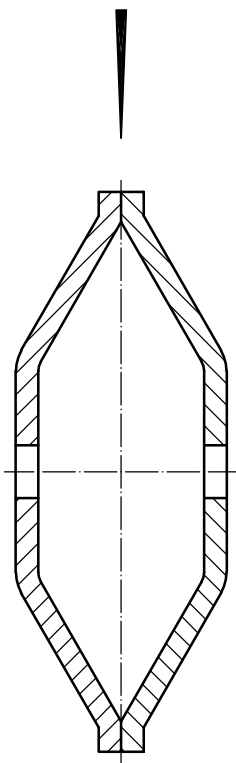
Work-piece with radial joint, centred using a welding jig
